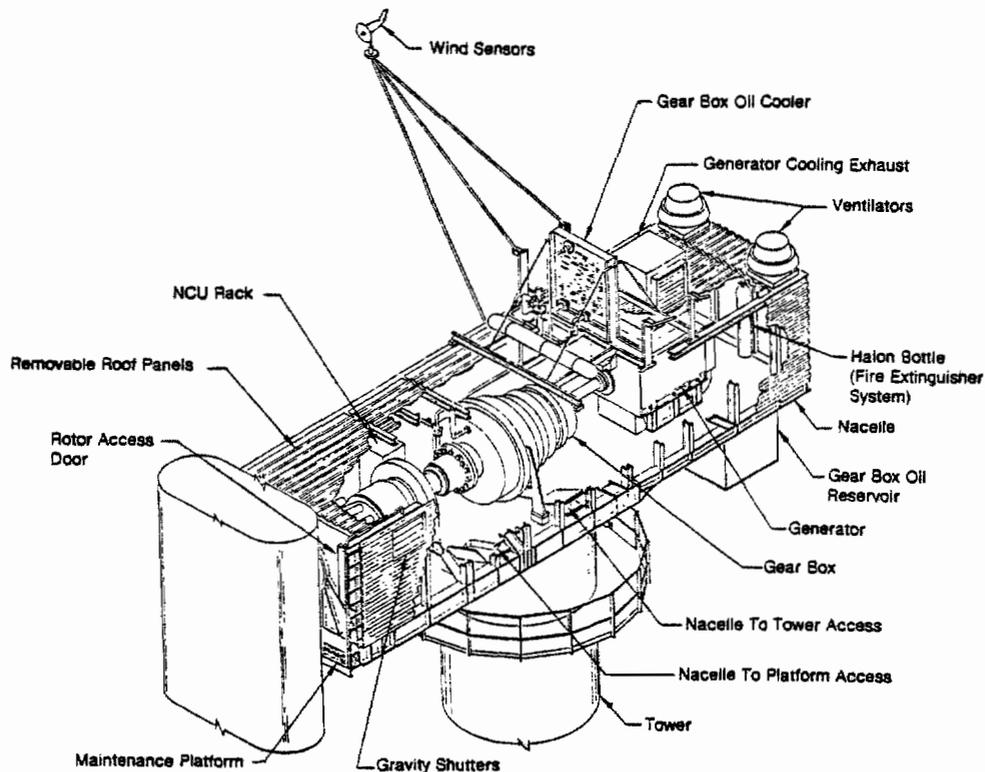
Nacelle Arrangement (Source: Linscott, Dennett and Gordon 1981)
